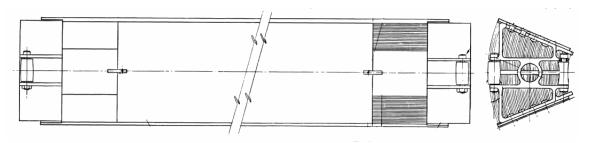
MURR FUEL SUBASSEMBLY
